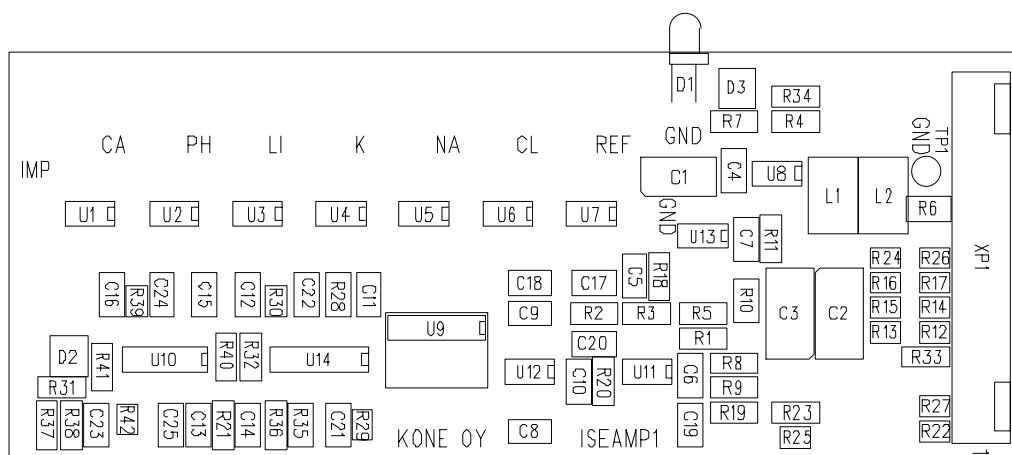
THE COMPONENT LAYOUT OF ISEAMP1
